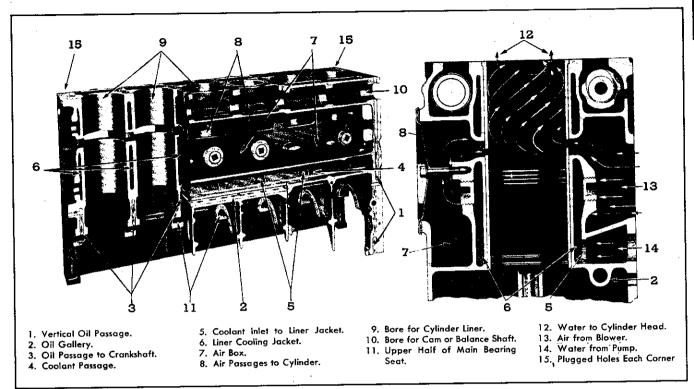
Cylinder Block and Crankcase, Showing Air, Lubricating Oil, and Water Passages
